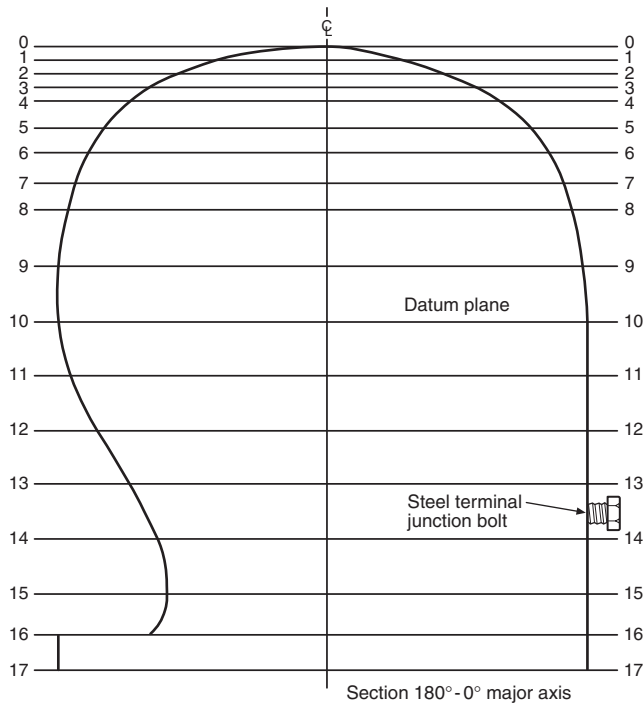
(b) ISEA size 7 headform, side with modification for steel terminal junction bolt.
